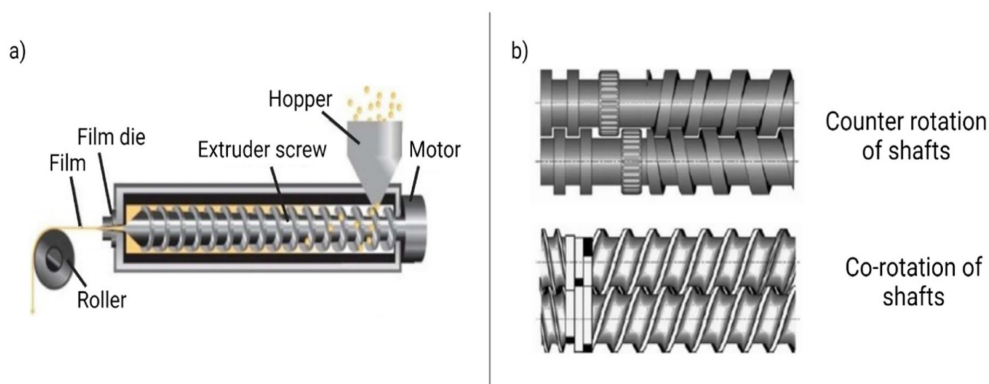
Film fabrication using hot-melt extrusion technique [44].
